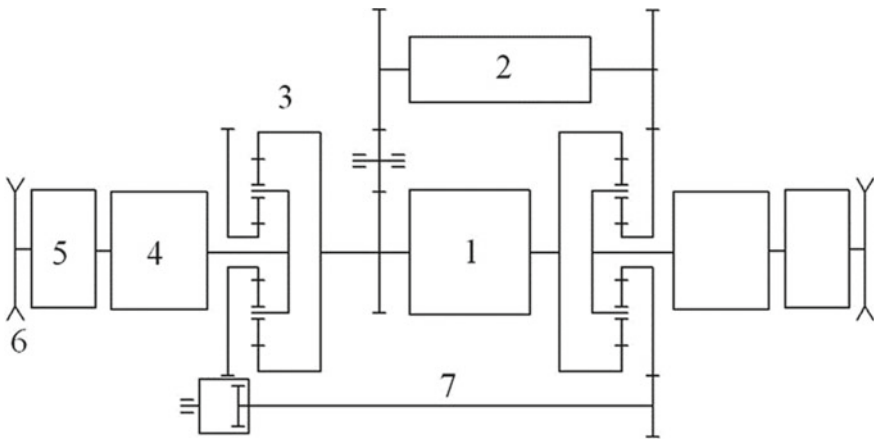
The split powertrain diagram with friction-controlled steering mechanism: 1—engine; 2—FSM; 3—summing planetary gear set; 4—on-board gearbox; 5—final drive; 6—drive wheel of the side; 7—inter-board contact
